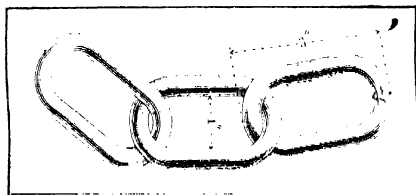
WELDING CHAIN-LINKS.
